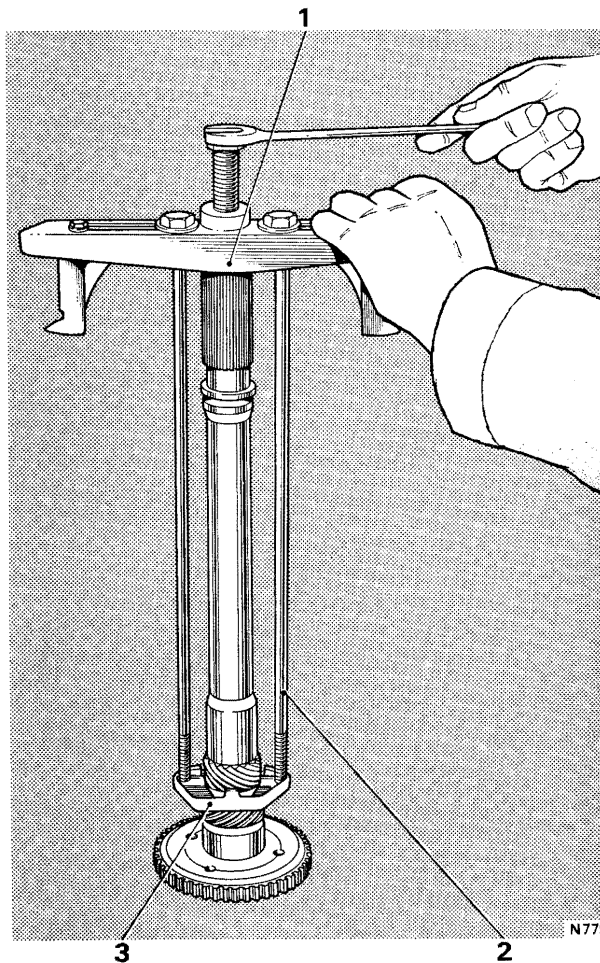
REMOVING A STEEL SPEEDOMETER DRIVE GEAR
